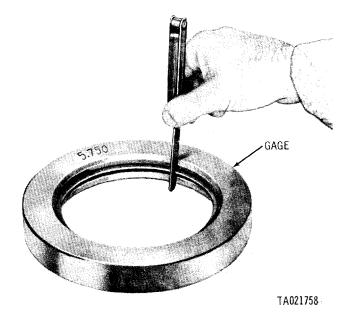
Measuring piston ring end gap using piston ring gage.
